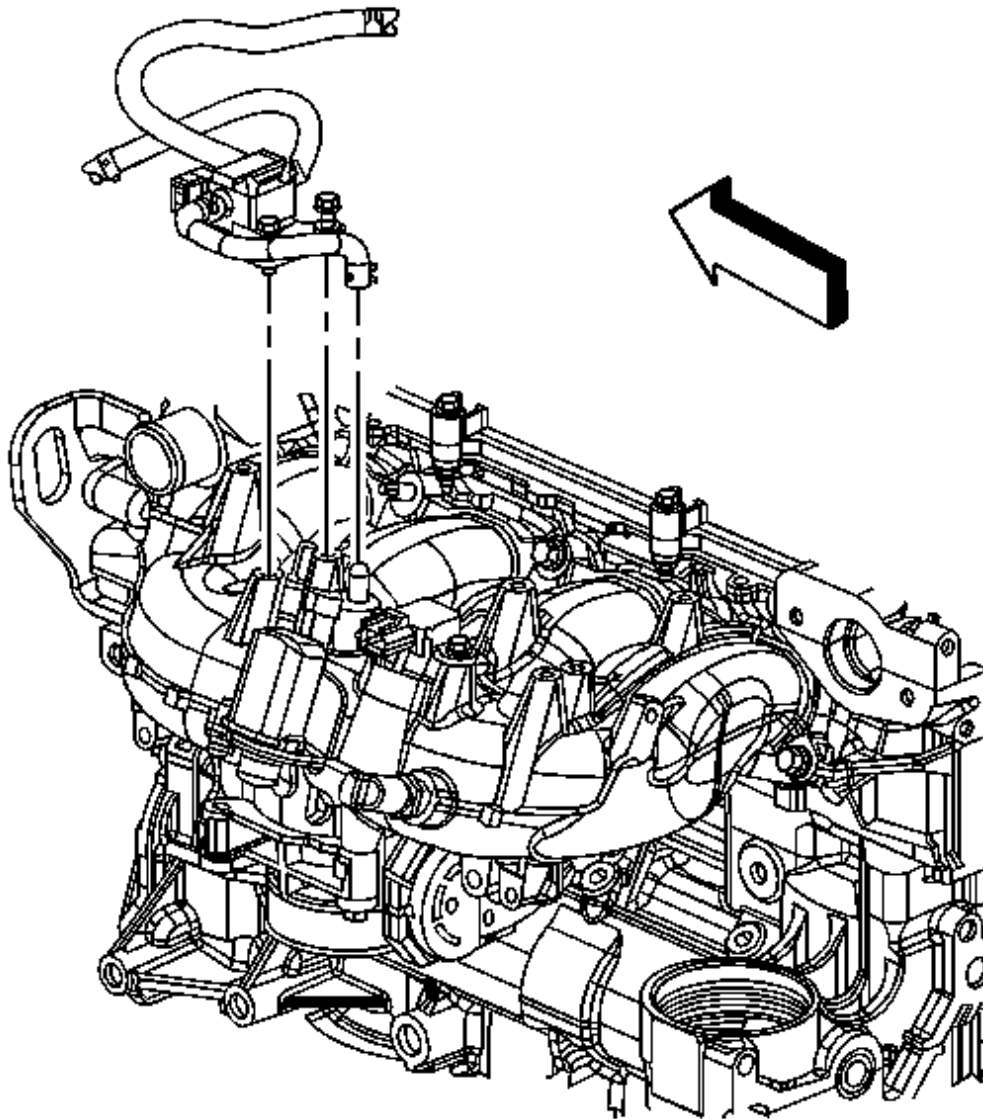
Identifying Charge Air Bypass Valve Solenoid Assembly
